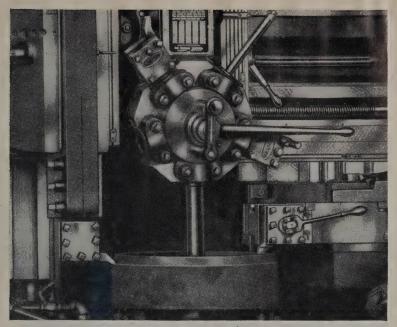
Machining solid stock on a vertical turret lathe.
